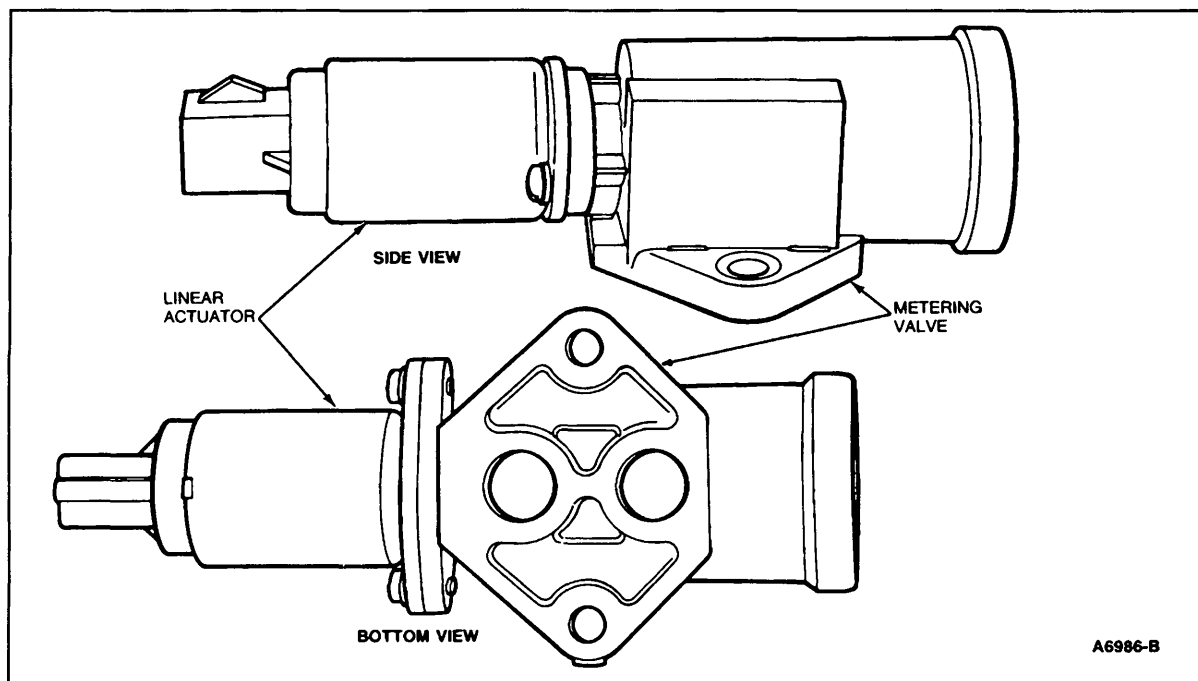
Air Bypass Valve Assembly — Connector May Be At An Angle
